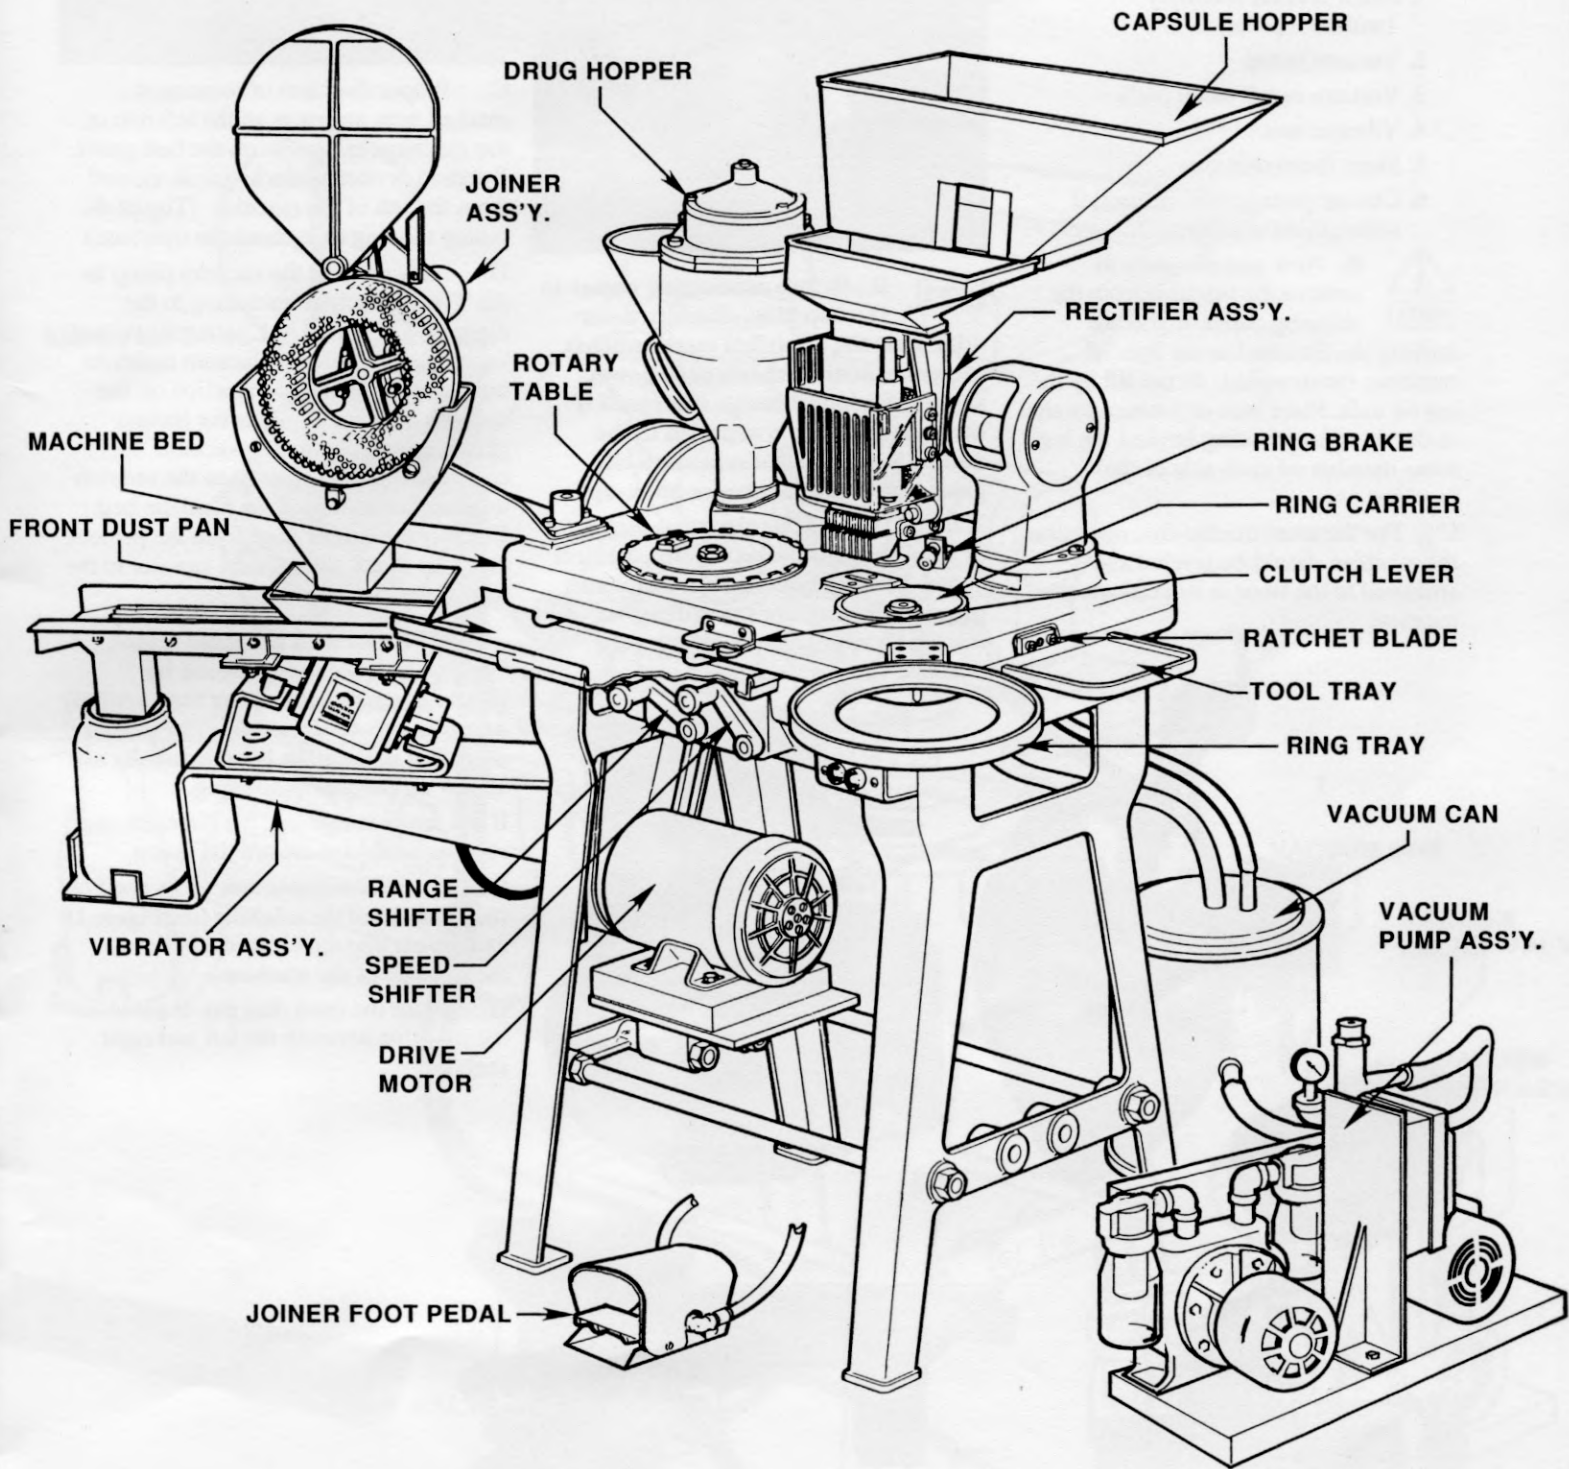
TYPE 8 CAPSULE FILLING MACHINE
